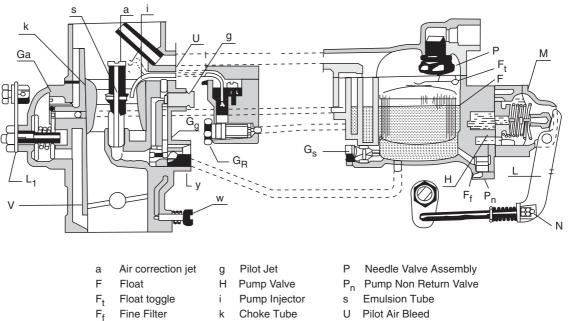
Solex Carburettor M 32 PBIC Exploded View (*Courtesy:* Mahindra and Mahindra Ltd.)
